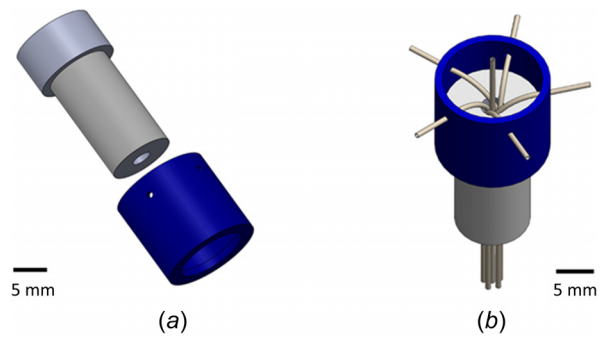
(a) Drawing of the two components of the fixture for manufacturing the cannula of the arborizing catheter. (b) View of assembled fixture holding and bending the PEEK tubing in place for bonding.
